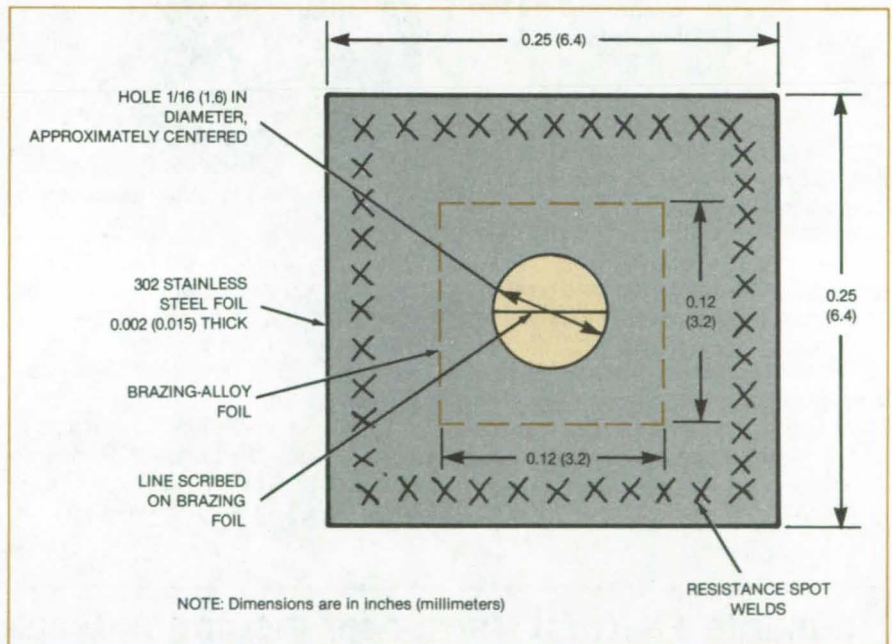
A Stainless-Steel Tab With a Circular Window holds a brazing-foil sample in place. The tab is tacked to the object to be tested with a capacitive-discharge spot welder operating in the range of 10 ± 1 joules.
